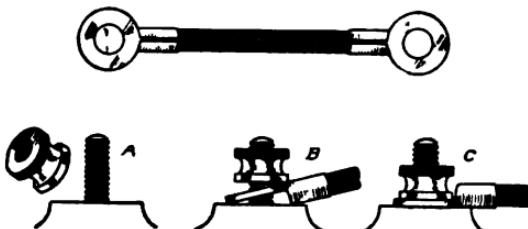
Proper and Improper Method of Attaching Dry Battery Wires
